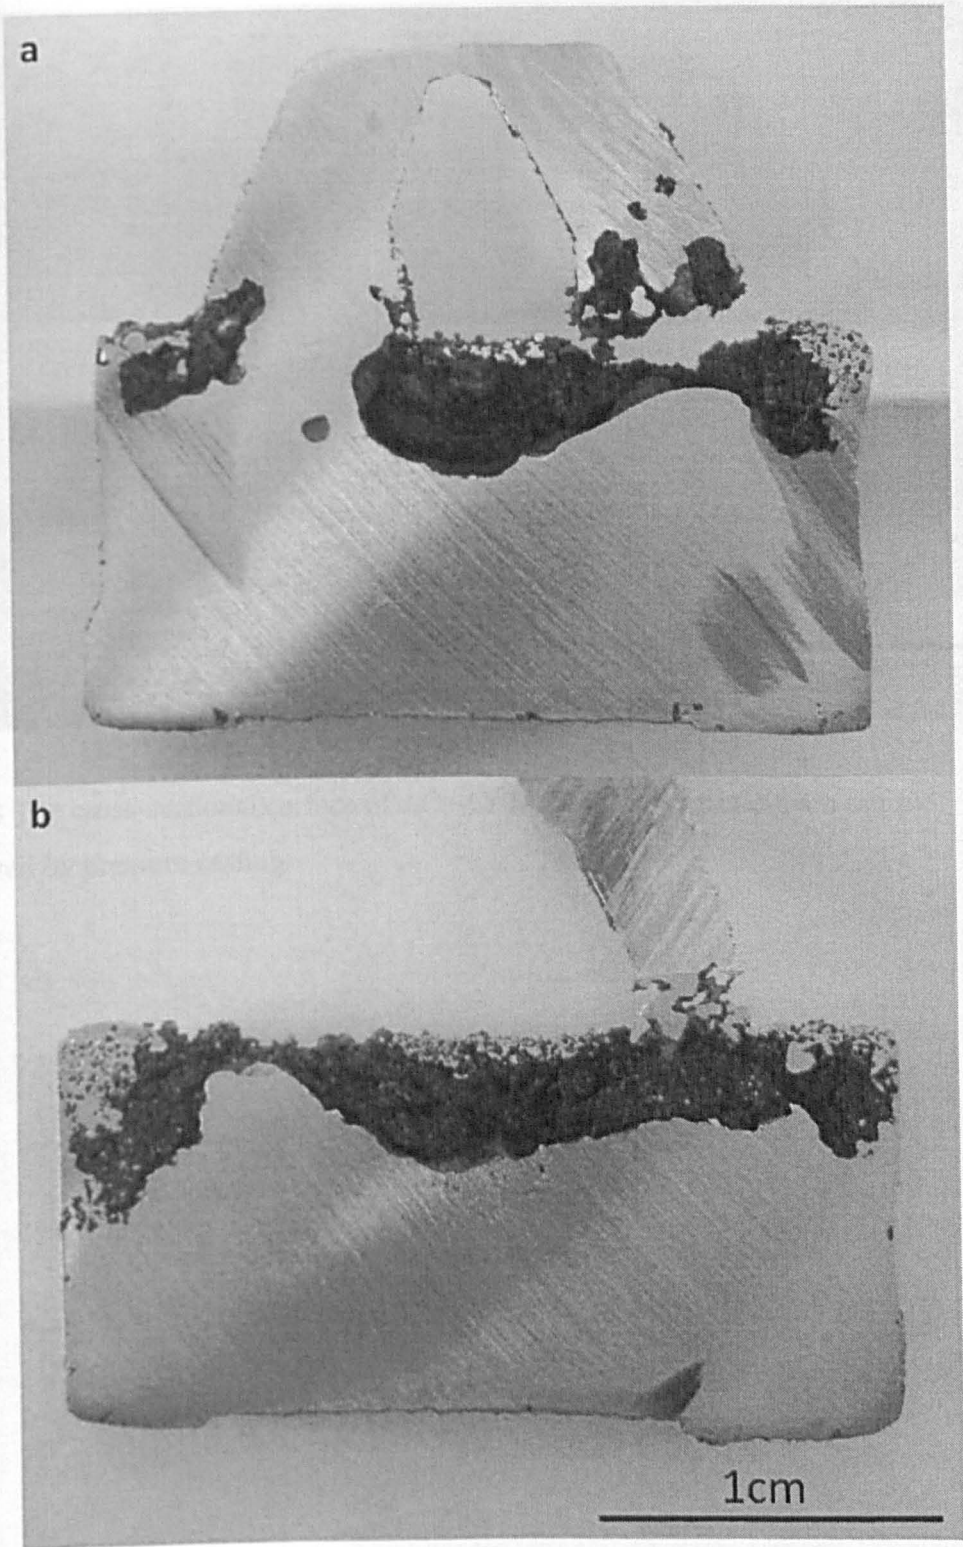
The cross-sectional surfaces of the Co-Cr-Mo alloy matrix syntactic foam sample fabricated by centrifugal casting.
